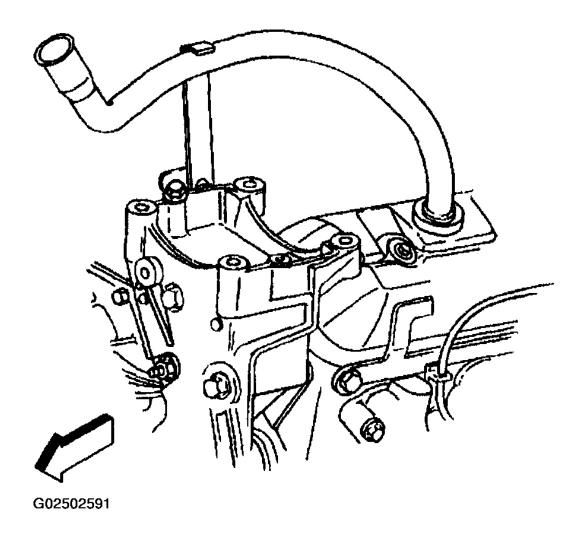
Installing PCV Valve Hose Assembly Courtesy of GENERAL MOTORS CORP.
